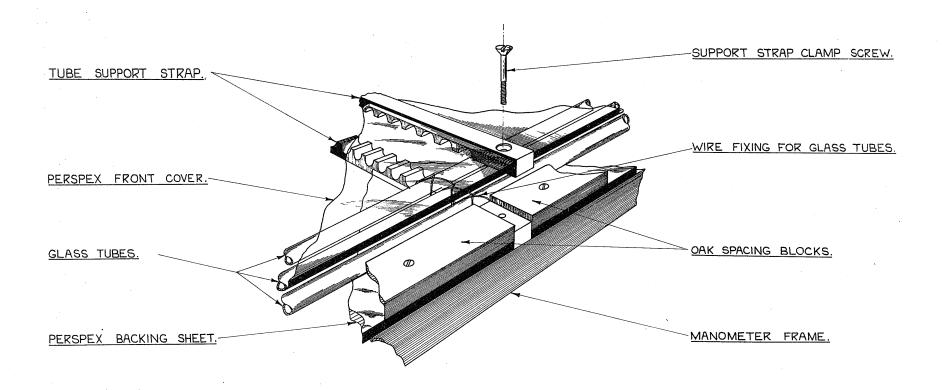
TUBE & PERSPEX COVER SHEET FIXINGS.
